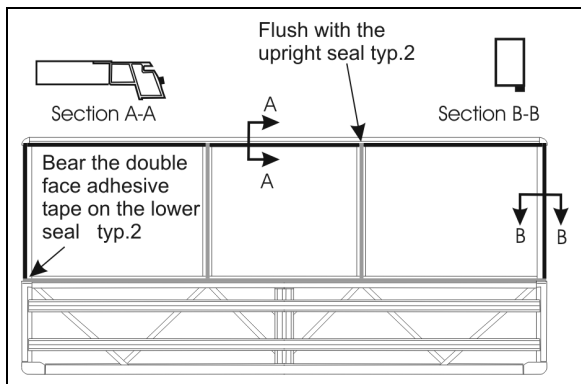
FACE FIXED WINDOWS – 3/16 X 1/2 DOUBLE FACE ADHESIVE TAPE INSTALLATION
